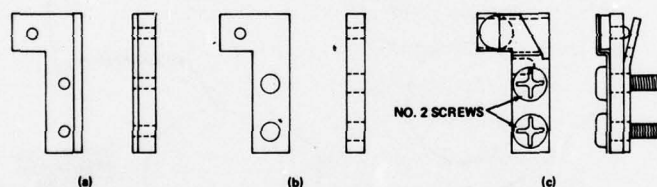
Improved fastening of retainer: (a) phase I retainer, (b) phase II retainer, and (c) phase II retainer fastening.
